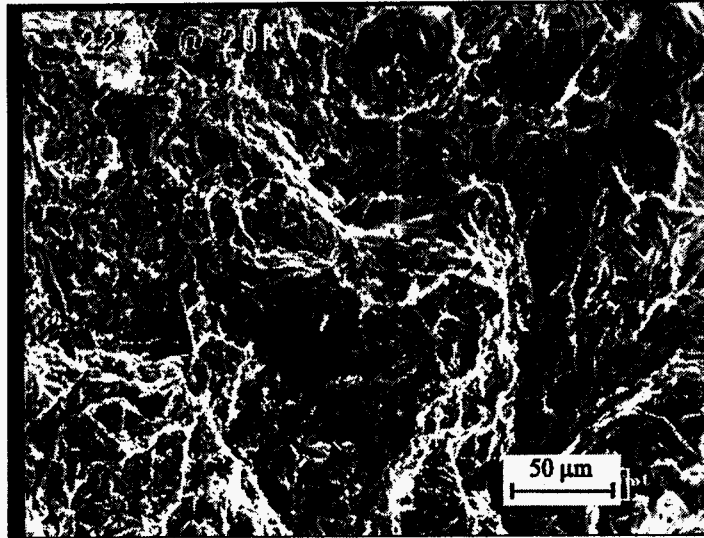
Macro View of Oxide Particles on the Surface of Aluminum 319 Alloy Testbar, broken under Uniaxial Tensile Loading
